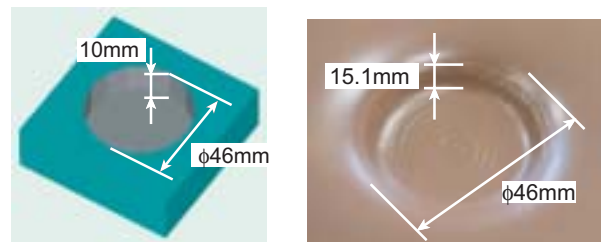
Defined shape Fig.7 Workpiece shape after hammering without compensation
